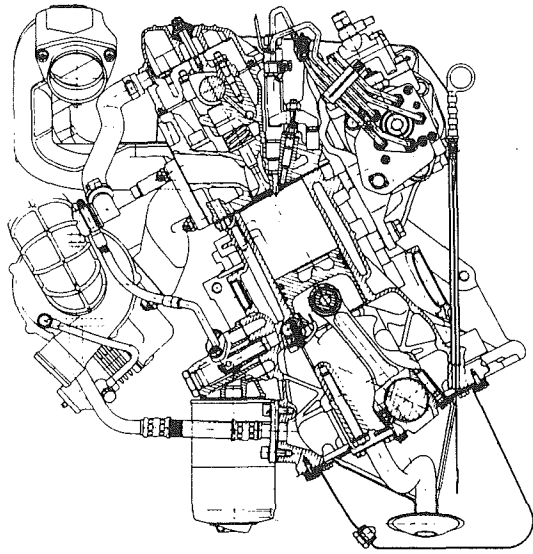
Cross-sectional drawing of new five-cylinder turbocharged passenger car 2.46-liter direct-injection diesel engine (Bauder and Stock, 1990)
